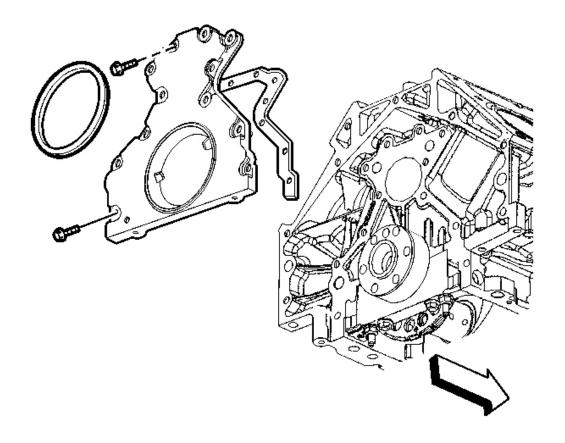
View Of Rear Cover, Bolts & Gasket Courtesy of GENERAL MOTORS CORP.
